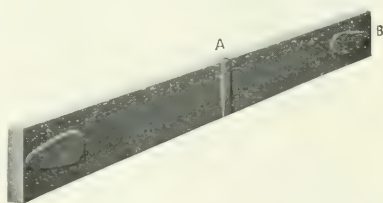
WROUGHT IRON PLATE USED IN RAIL WELDING
